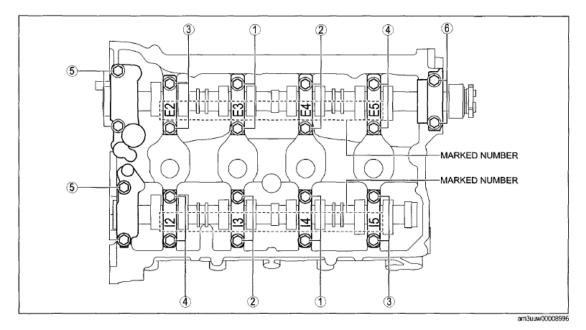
Identifying Camshaft Cap Bolt Tightening Sequence
